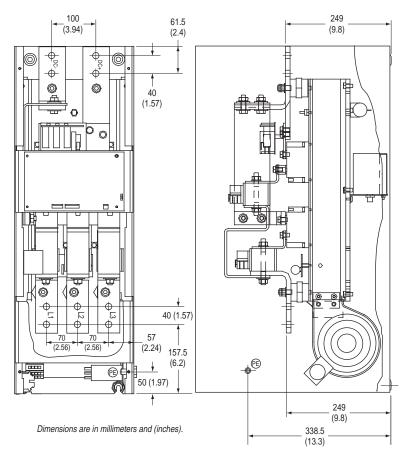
1000A Unit Bus Bar Customer Connection Point Dimensions/Locations
